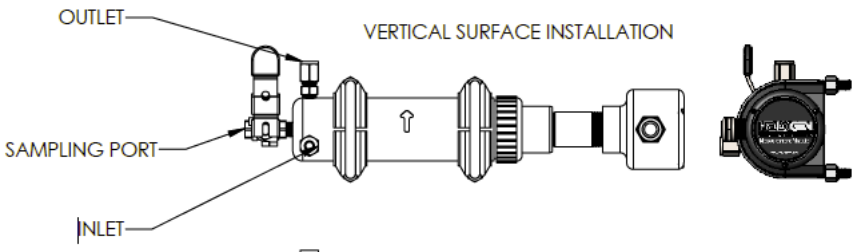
Chamber installation on a vertical surface. The label indicates the outlet port position. Label should face up. Inlet and outlet are 3/8" OD tube fittings.
